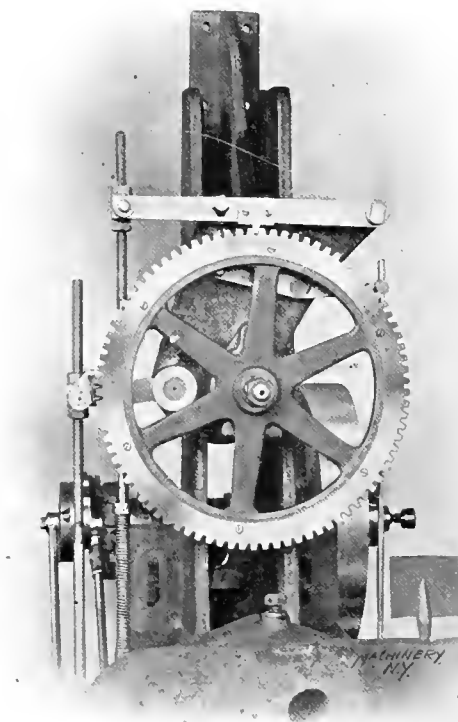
View of Indexing Mechanism, Zeh & Hahnemann Armature Notching Machine.
